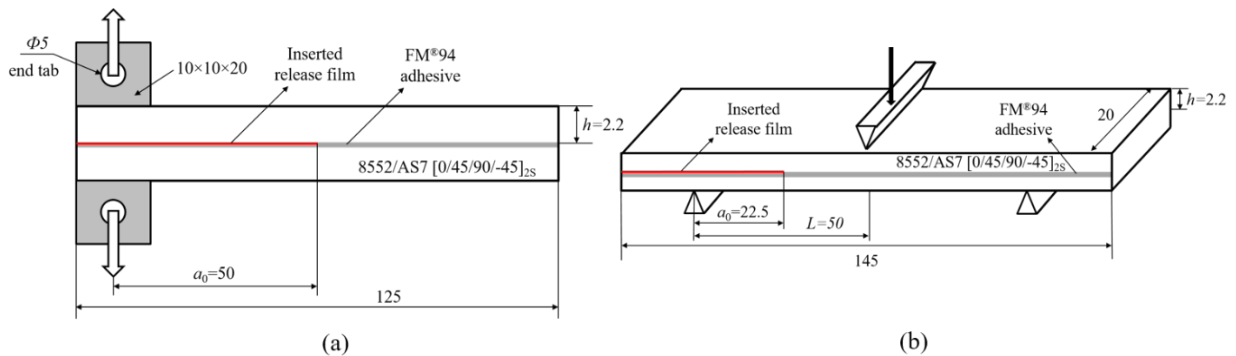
Dimensions, materials and layout for DCB and three-point ENF specimens (unit: mm). Disbond starter was inserted at the adherend-adhesive interface.
